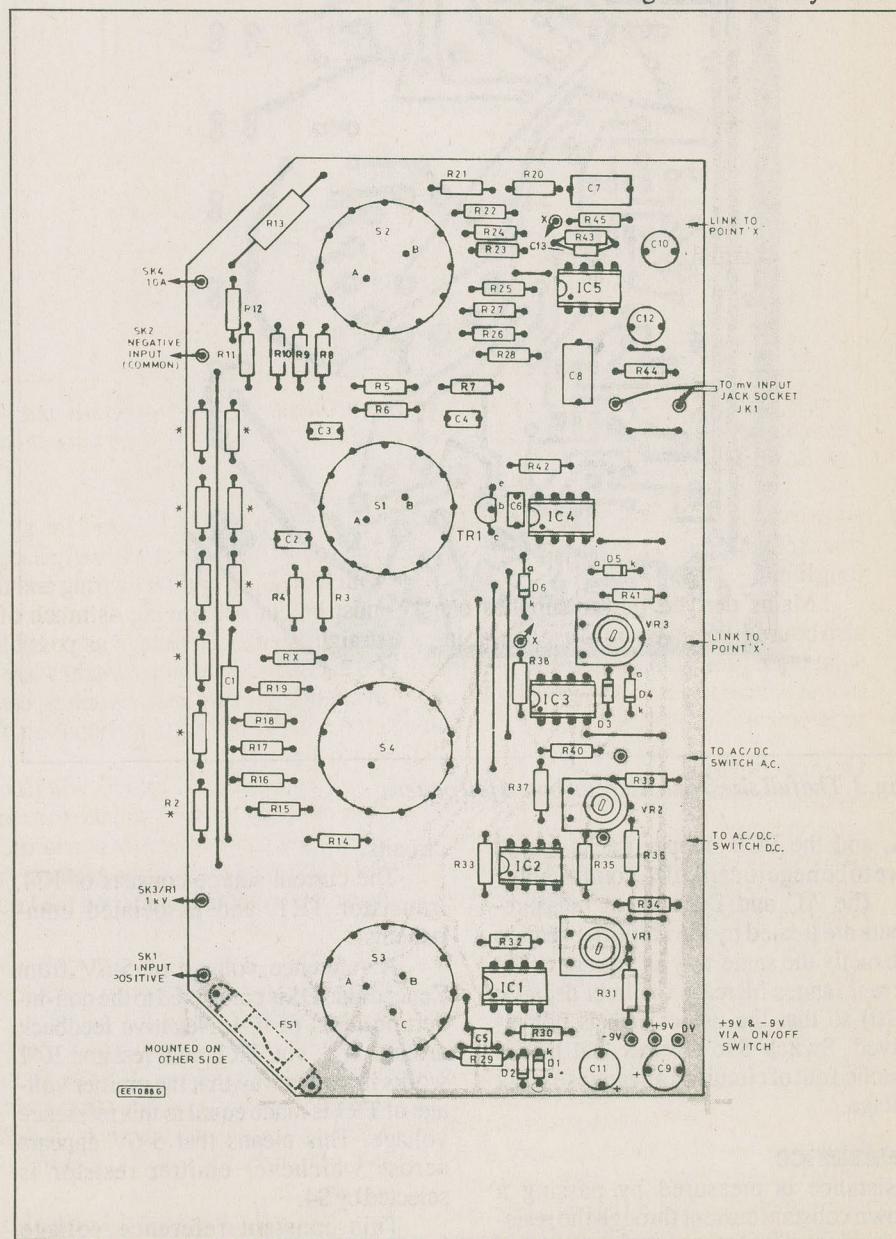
Component layout on the printed circuit board. Note that the long link wires should be made with plastic insulated connecting wire.
